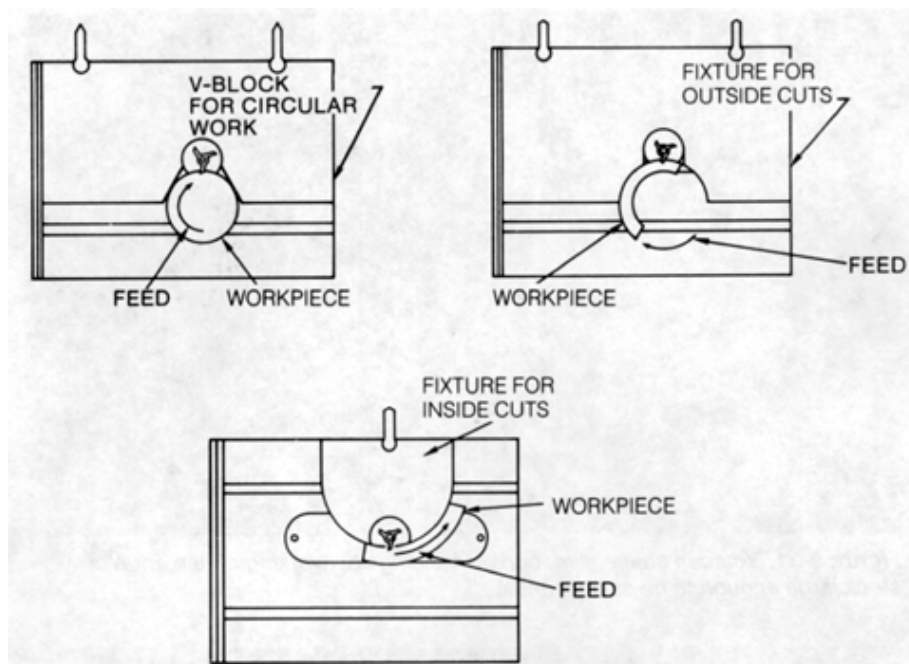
Here are examples of special fixtures you can make when you have many similar workpieces to produce. Fixtures must be designed to suit the work you are doing. The position of the fixture determines how far the cutter penetrates the workpiece. The fixture control area must match the curve in the workpiece. Be sure the contact areas are sanded smooth.
